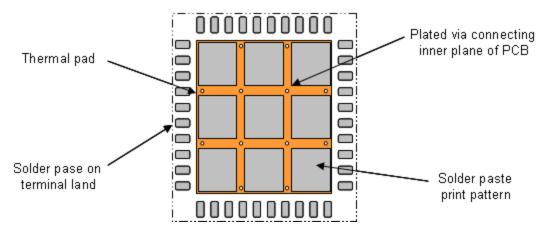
Segmented solder paste pattern with plated vias on thermal pad.
